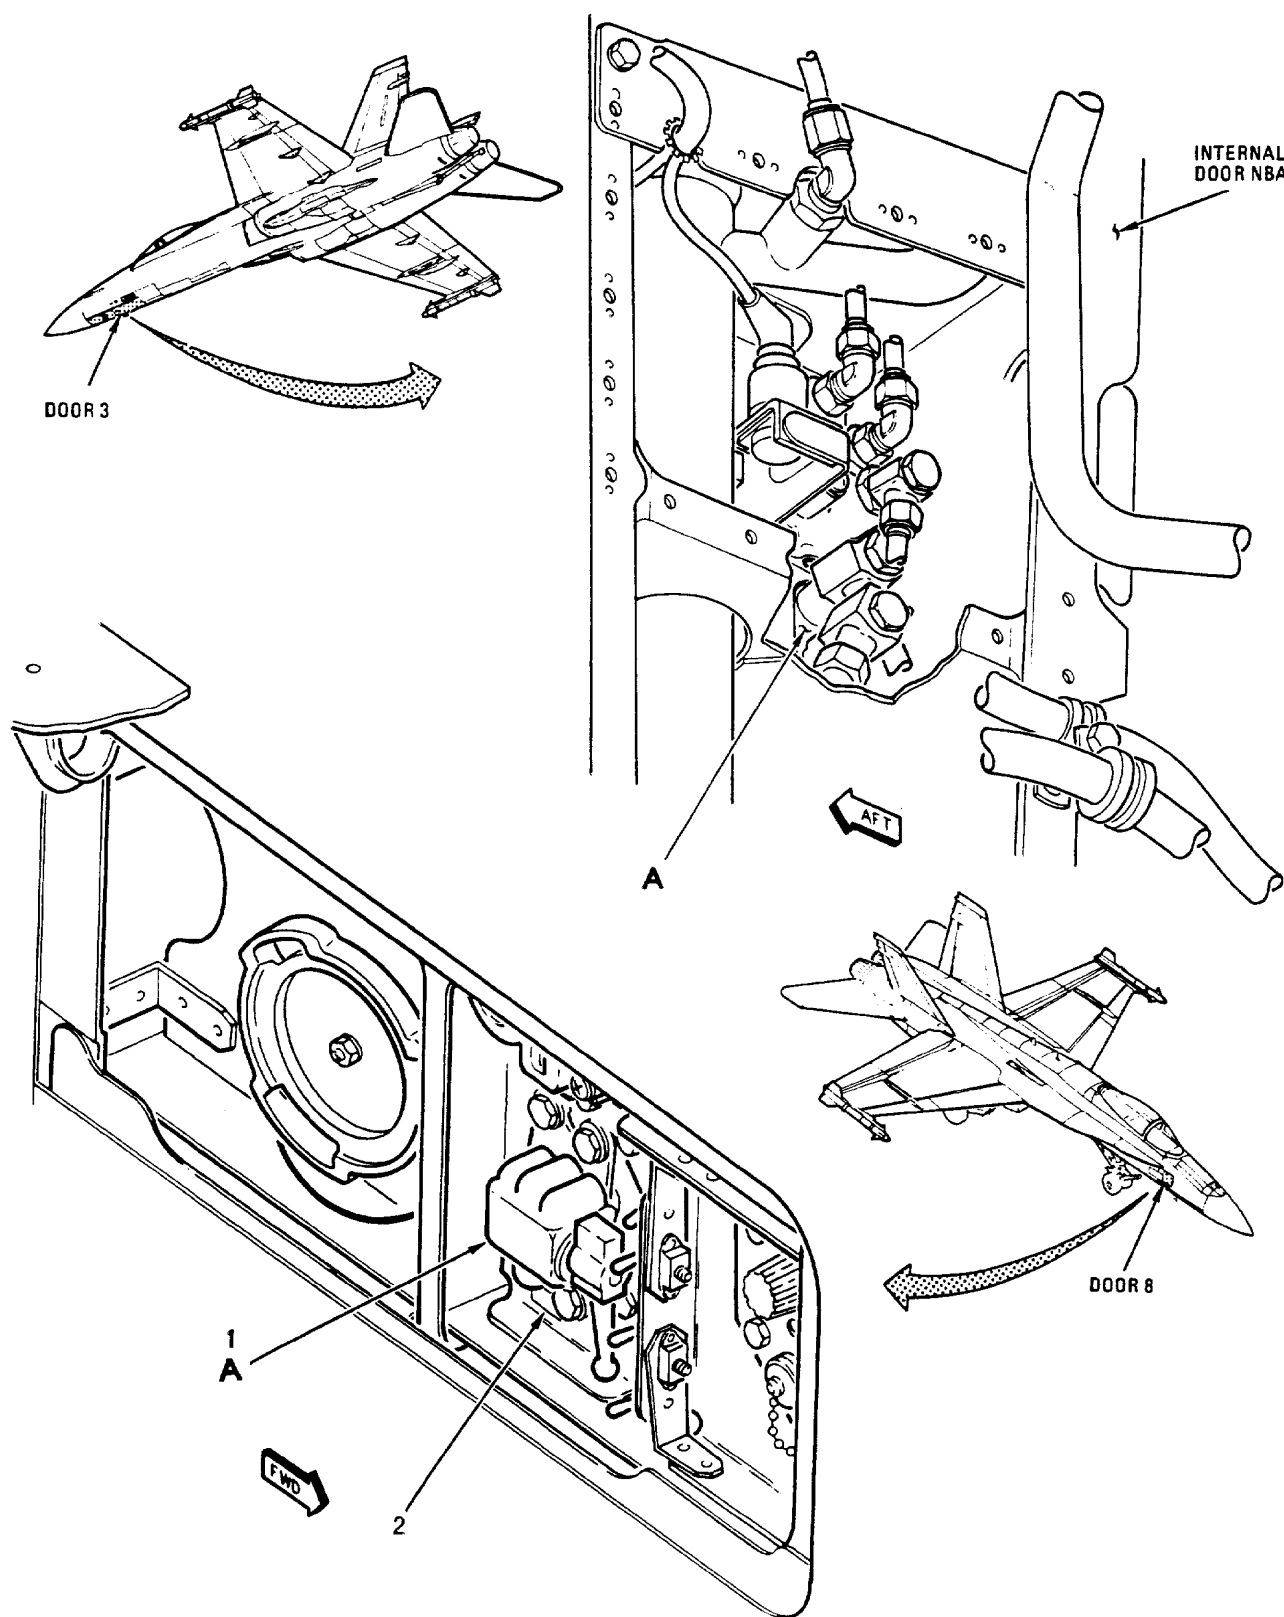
Master Precheck Valve (5VAD624) (Sheet 1)
